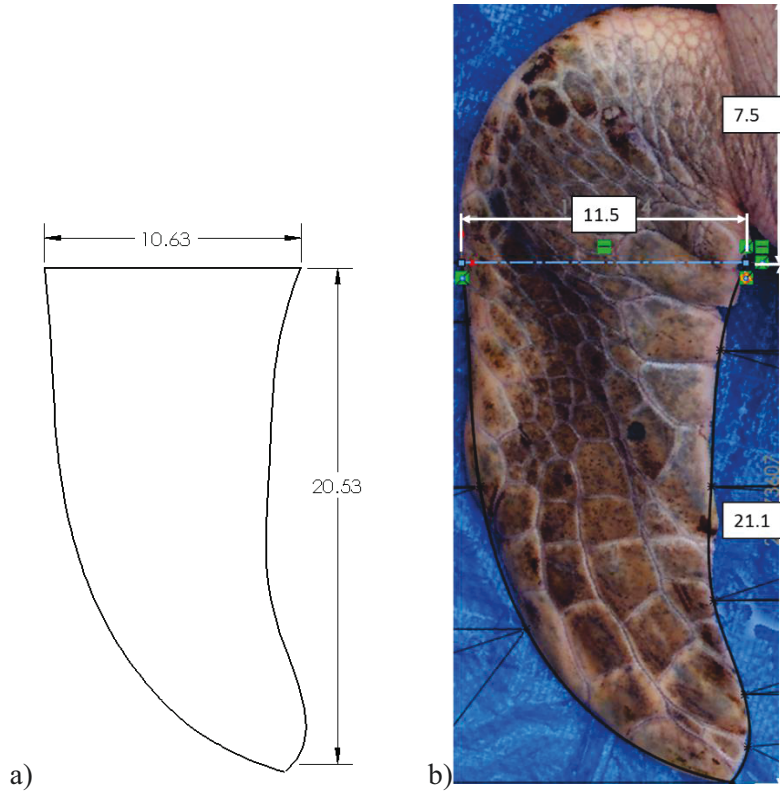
Dimensions [cm] of a) SolidWorks Flipper b) Lola’s Healthy Flipper
